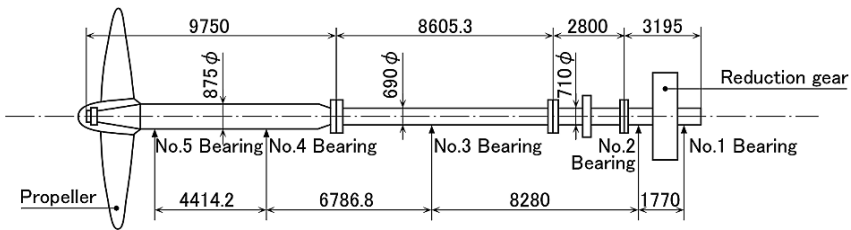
Shaft arrangement of 200,000DWT turbine tanker
